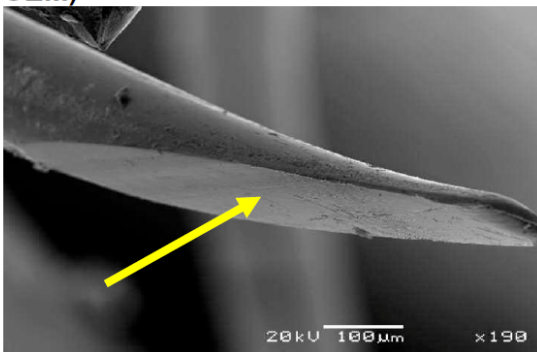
Fractograph showing typical outer strand wire fracture geometry (x190, SEM)
